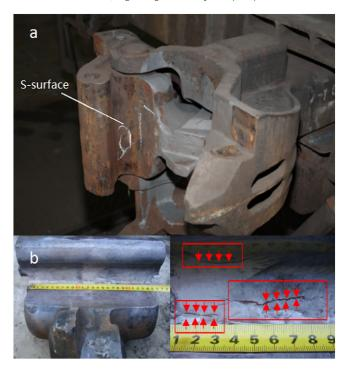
Type17 coupler and fatigue crack on its S-surface.
